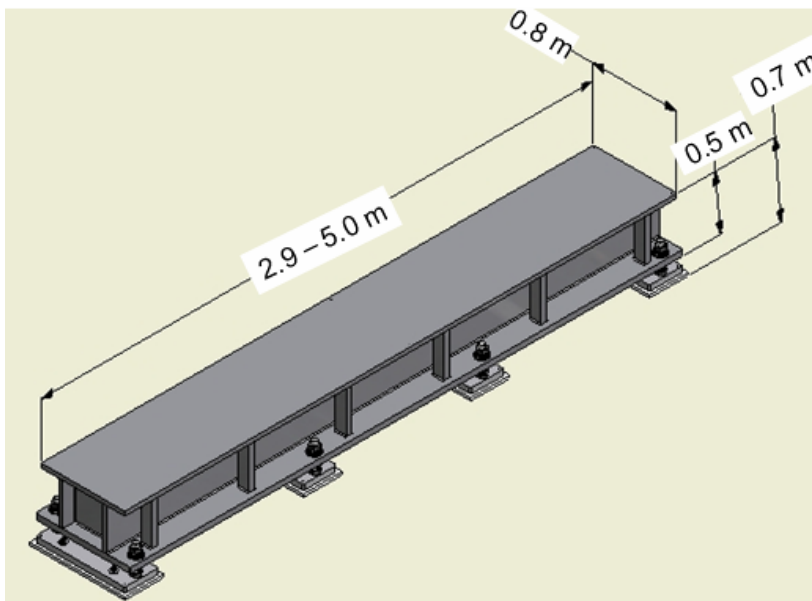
Preliminary design of the NSLS-II storage ring girder.
